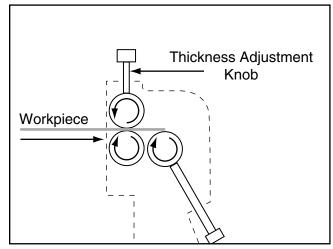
Workpiece inserted between top and bottom roller and centered over rear roller.
